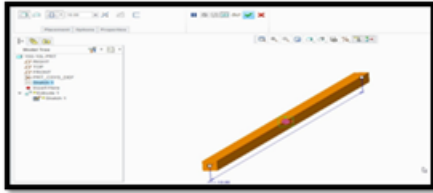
D Drawing of micro channel heat sink with fluid area with dimensions 100 µm \* 50 µm \* 10mm
